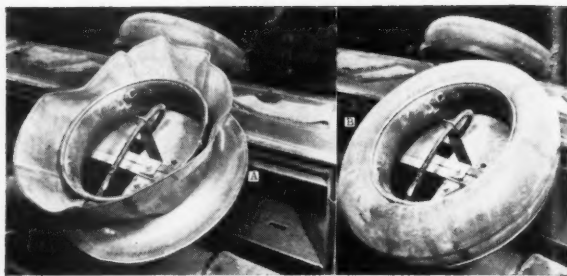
Tube Shaping: (A) Helical Tube before Inflation; (B) Helical Tube after Inflation and Ready for Molding (Note Circumferential Rib Still Evident Indicating Minimum of Stretch in Tube)
